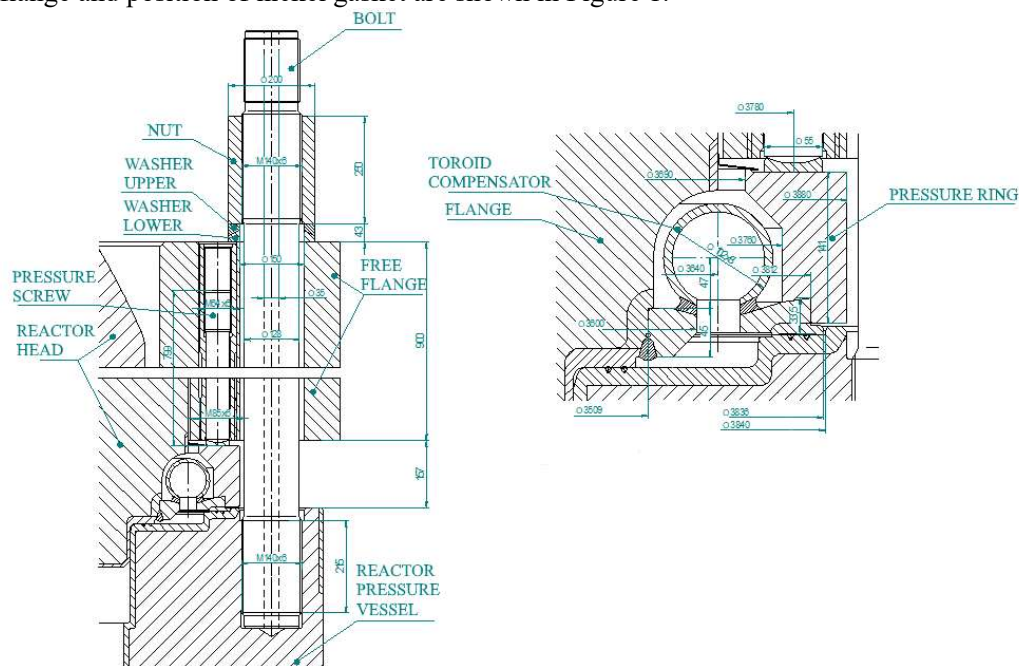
Part of the main flange of reactor VVER 440 and details of sealing and its positions.
